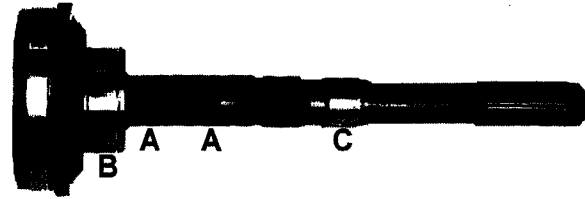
Transmission output shaft. A A indicates torque sensing region. The shaft is supported in the overdrive housing by ball bearings at B and C.
